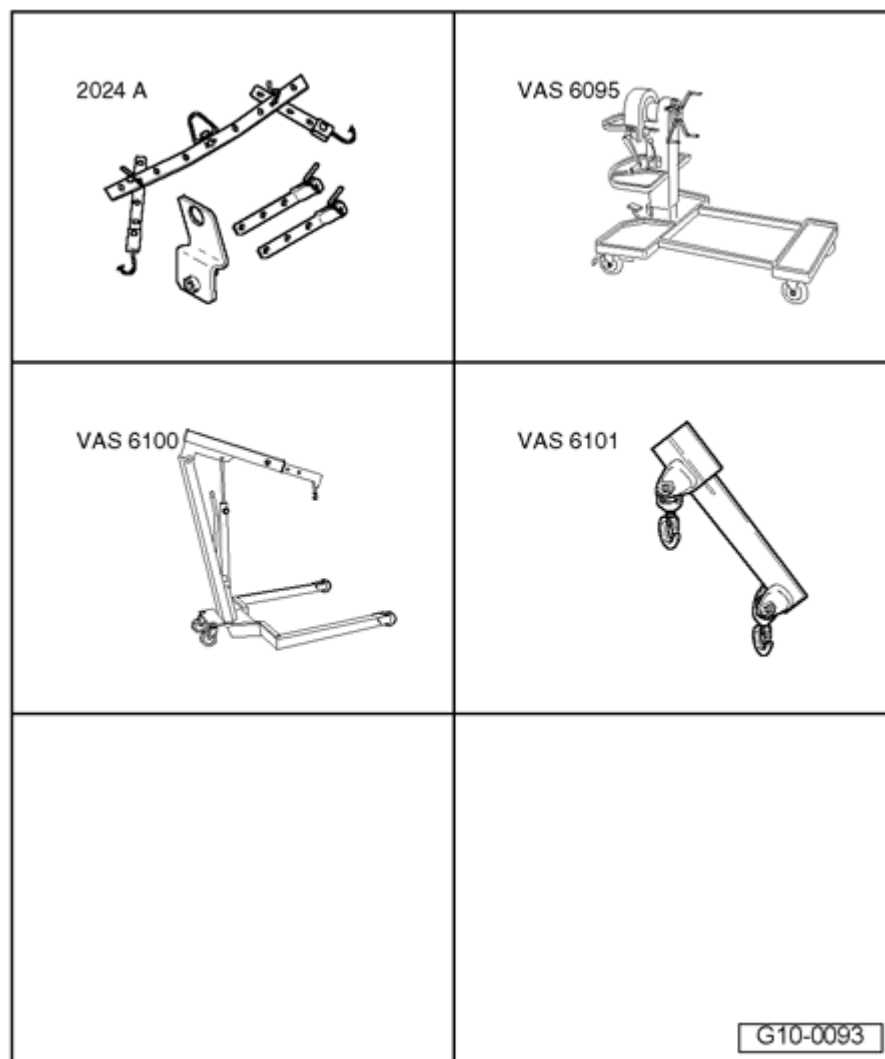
Identifying Special Tools - Engine, Securing To Engine And Transmission Holder
